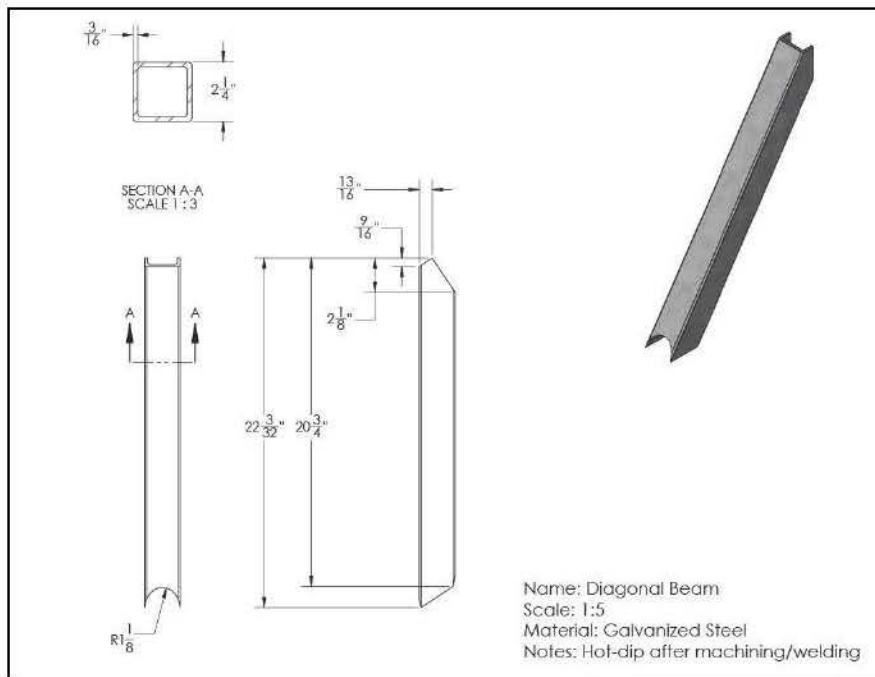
Engineering drawing for Starlink mount diagonal beam
